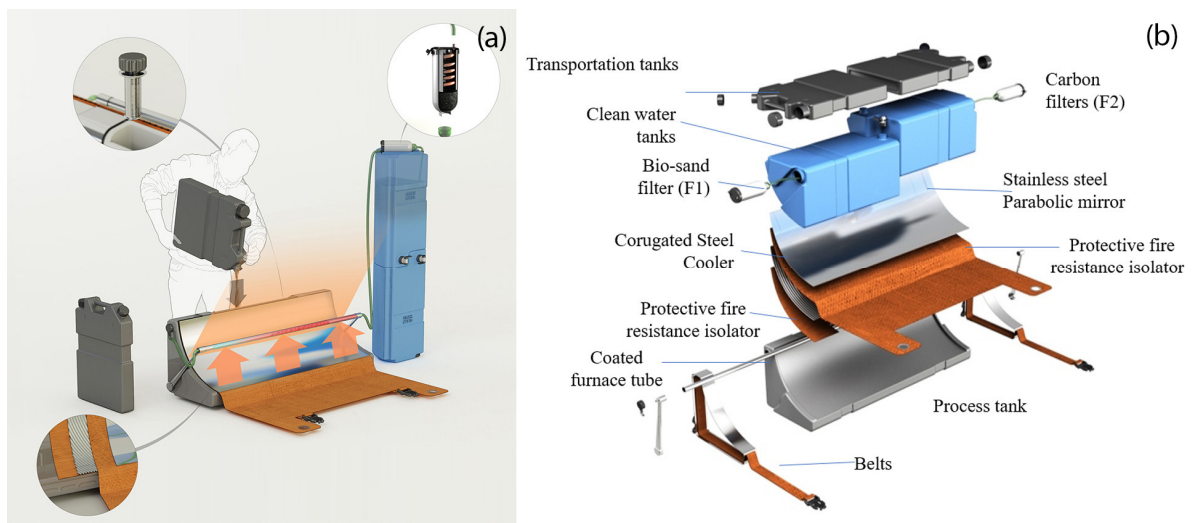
(a) The working stages; (b) Parabosol CSP system exploded.
